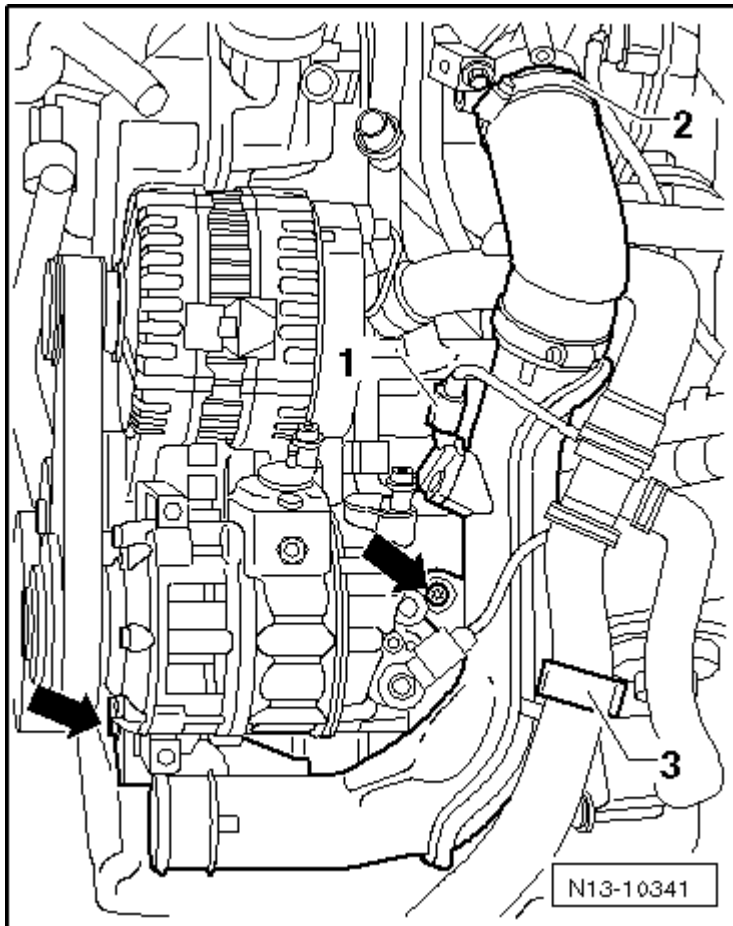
Identifying Connector -1-, Clamp -2 And Coolant Hose -3-
